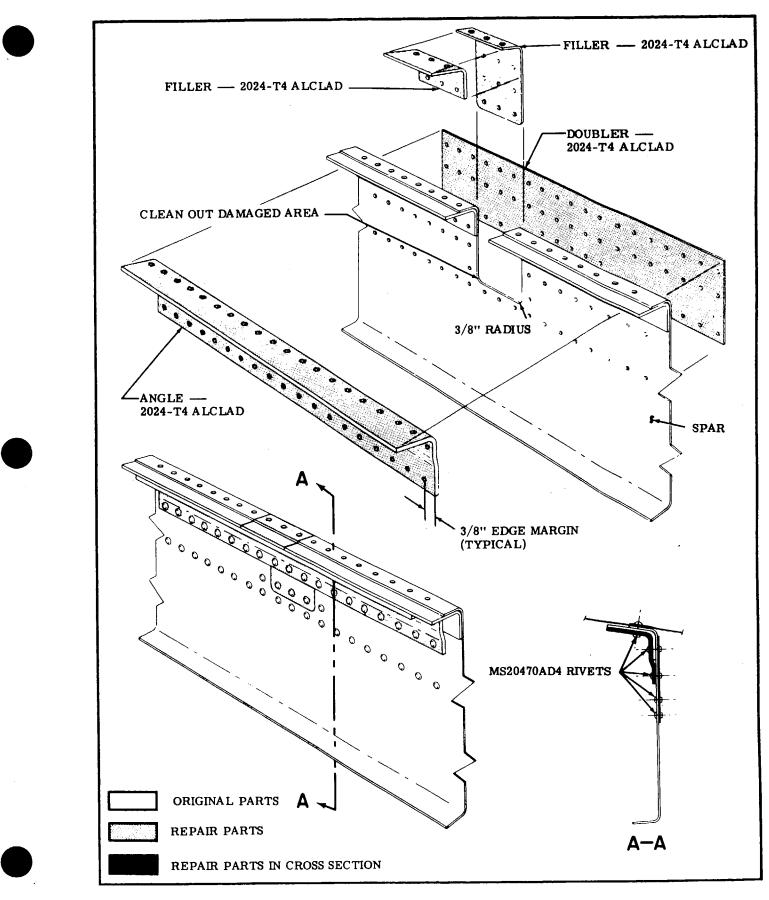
Wing Spar Repair (Sheet 1 of 4)
